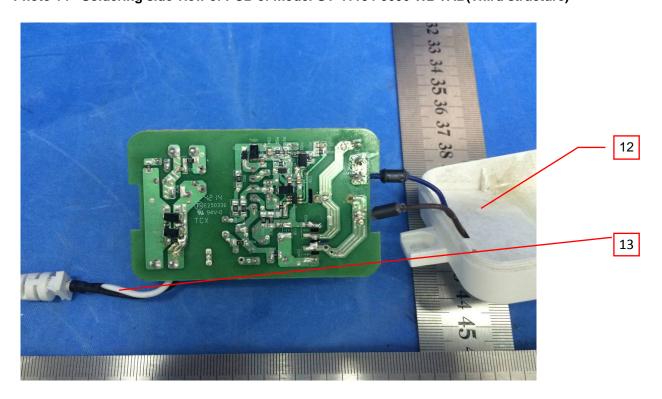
Soldering side view of PCB of model GT-41134-0606-W2-TAB(Third structure)
